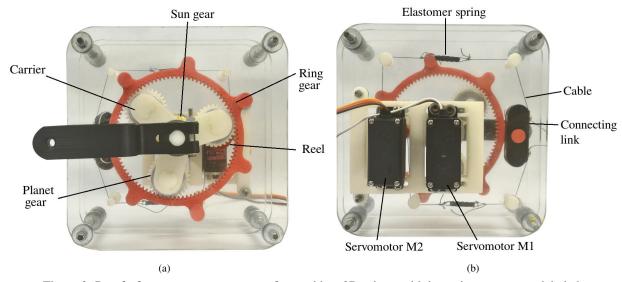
Proof-of-concept prototype manufactured in a 3D printer with its main components labeled.
